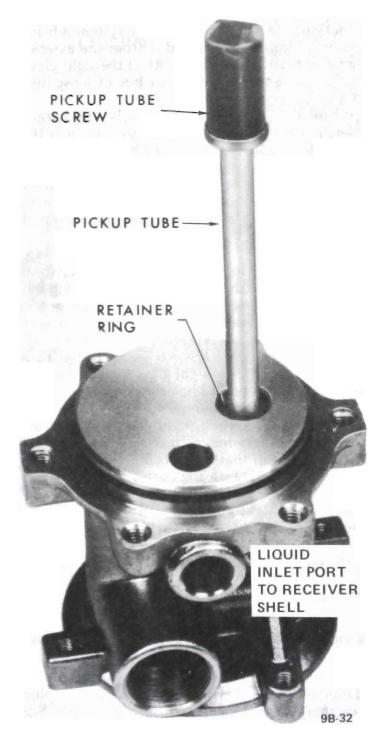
B-36 Pick-Up Tube Assembly to Valve Housing
